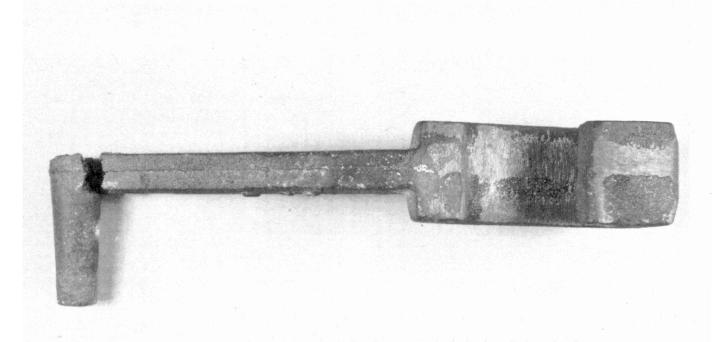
"T" Bar Refractory Hanger Casting Failure.
